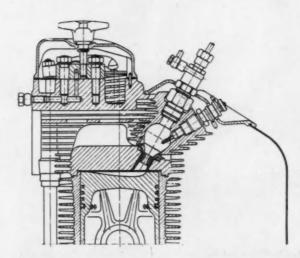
Combustion chamber of aircooled diesel engine with MWM balanced-pressure precombustion chamber (GV).
